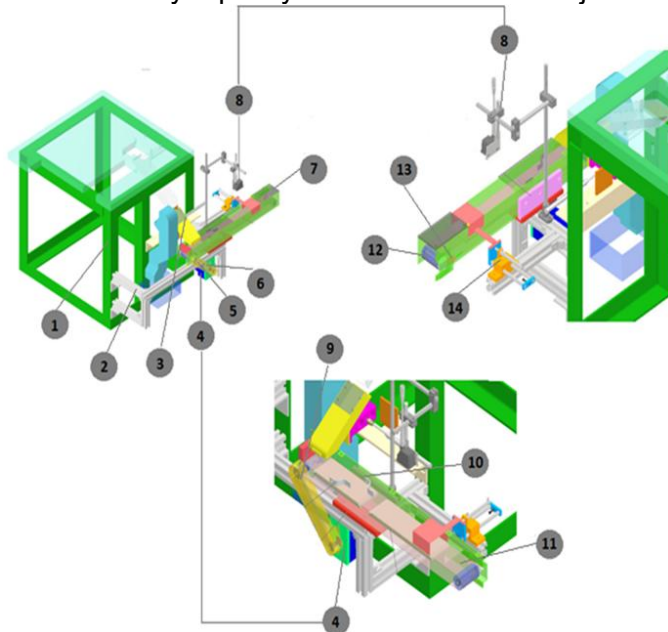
Automatic vision system. (1) Main machine processes; (2) Aluminium frame automatic vision inspection; (3) Main machine shutter; (4) Stepping motor; (5) Sprocket; (6) Chain; (7) Cover conveyor; (8) Vision sensor; (9) Cover sprocket and chain; (10) Product guide; (11), Belt conveyor; (12), Pulley; (13) Slide cam; (14) Cylinder ejection
